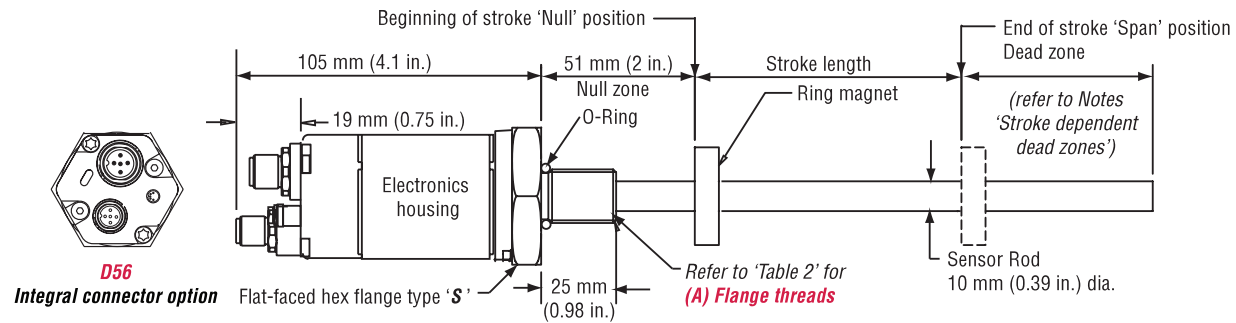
Model RH Rod-style sensor dimension reference (shown with D56 integral connector options)
